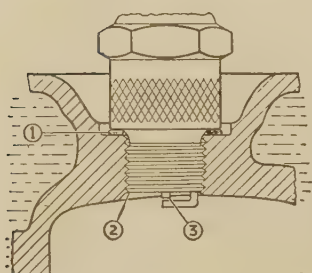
Illustrating Method of Fitting Sparking Plug in High Performance Engine.
